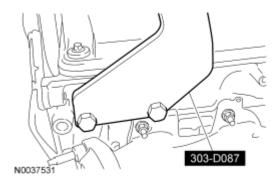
Installing Special Tool To RH Cylinder Head Courtesy of FORD MOTOR CO.
